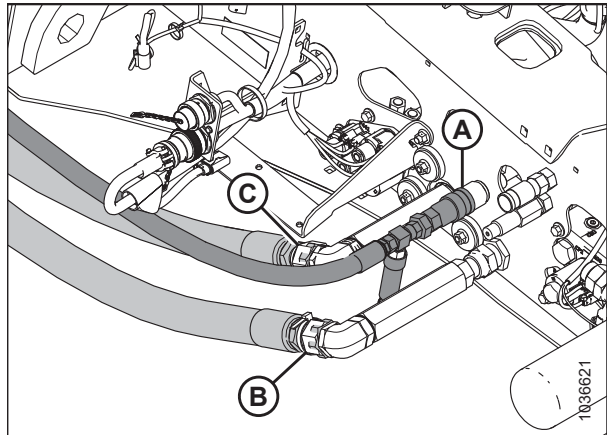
Header Drive Hydraulics – M1240, Rotary Disc Configuration with Hard-Plumbed Fittings
